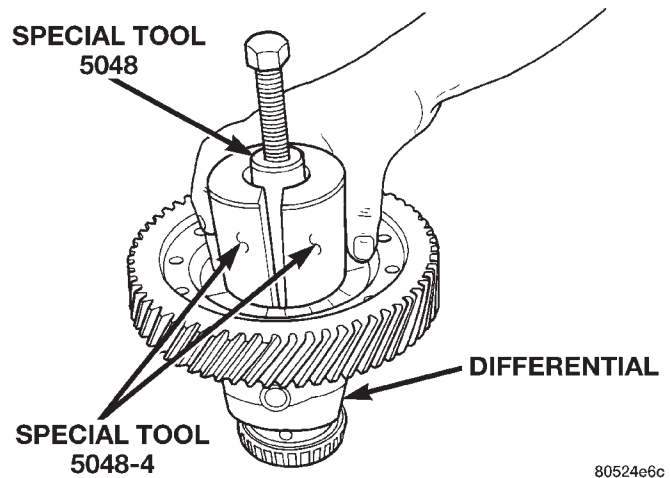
Position Tool 5048 Over Button and Collets at Differential Bearing (Ring Gear Side)
